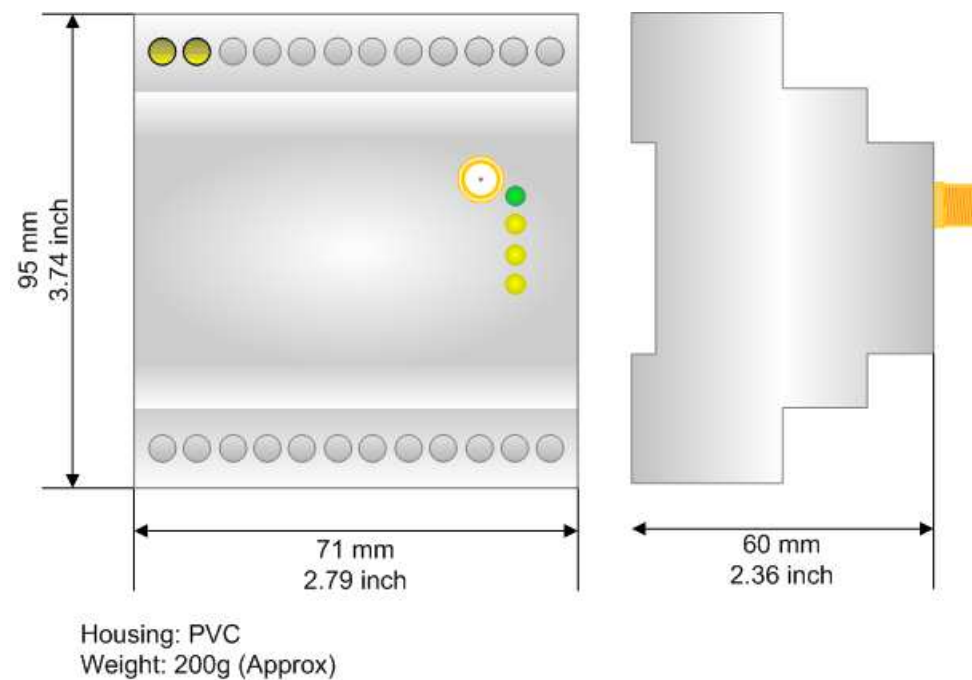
Mechanical dimensions scheme for HD67086-B2-xxxMHz-xxx
